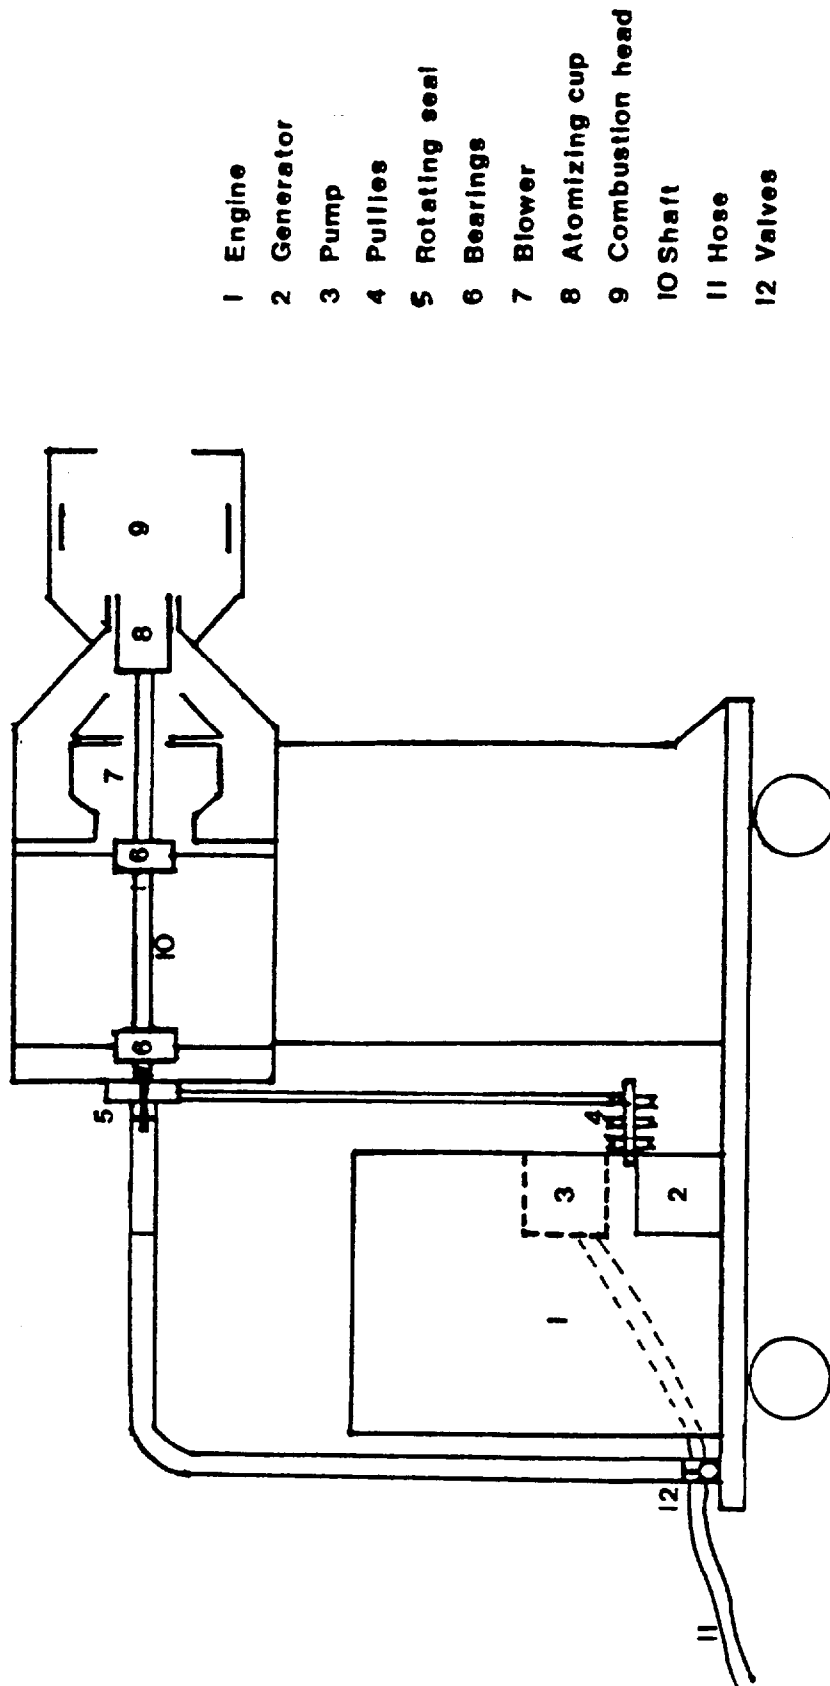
The prototype "Swirlfire" burner showing the combustion chamber, rotary cup and ignition port
